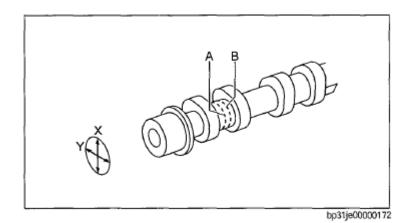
Identifying Camshaft Journal Diameter Measurement Positions A And B
